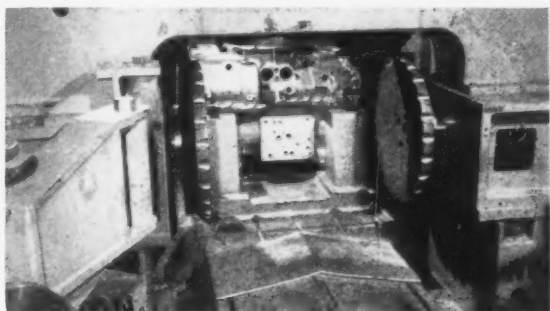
End faces of housing assembly are straddle milled in a Newton machine having 30-in. cutters with solid inserted carbide blades. Cutters retract to clear work on return.
